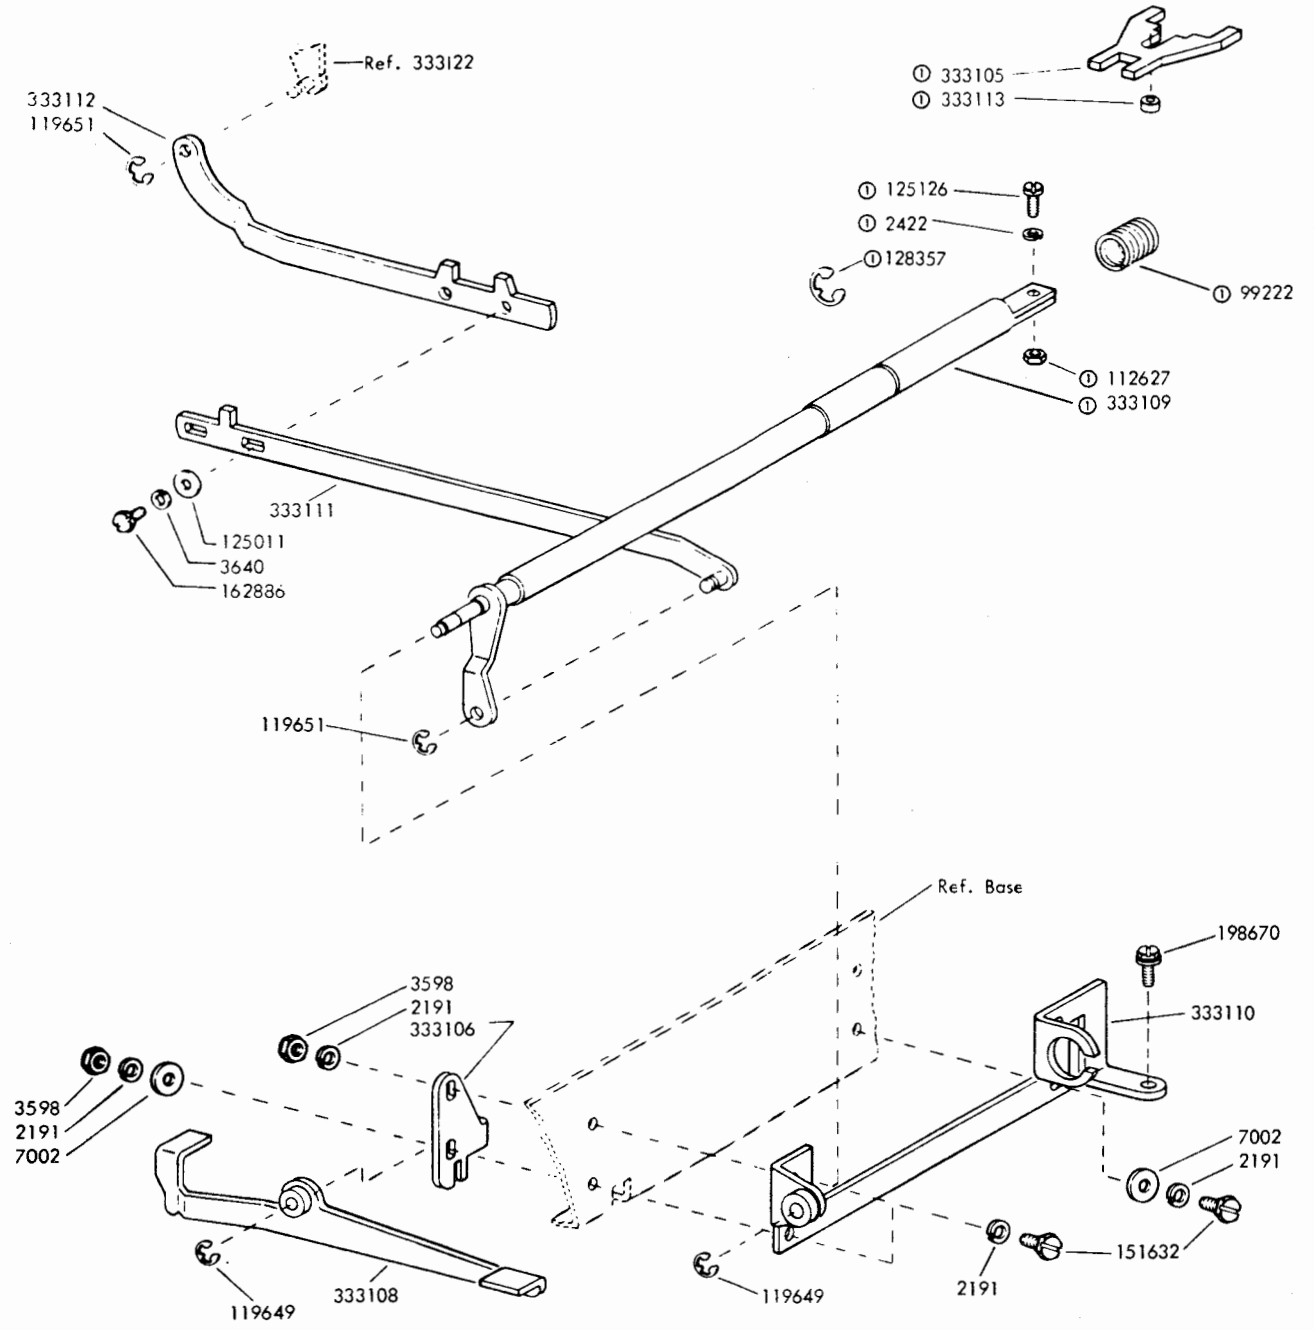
Keyboard Assembly - Used on Low-Level Sets
